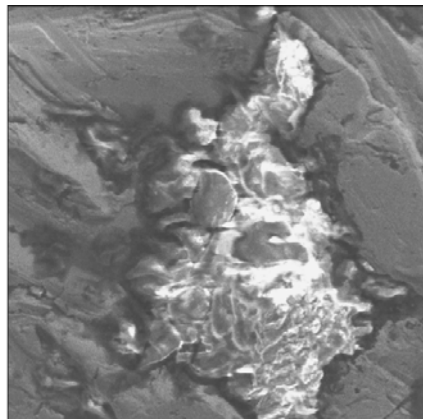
Piled-up sheet blank material (shiny sections) on the non-heat treated AISI A2 die sample contact surface after test
